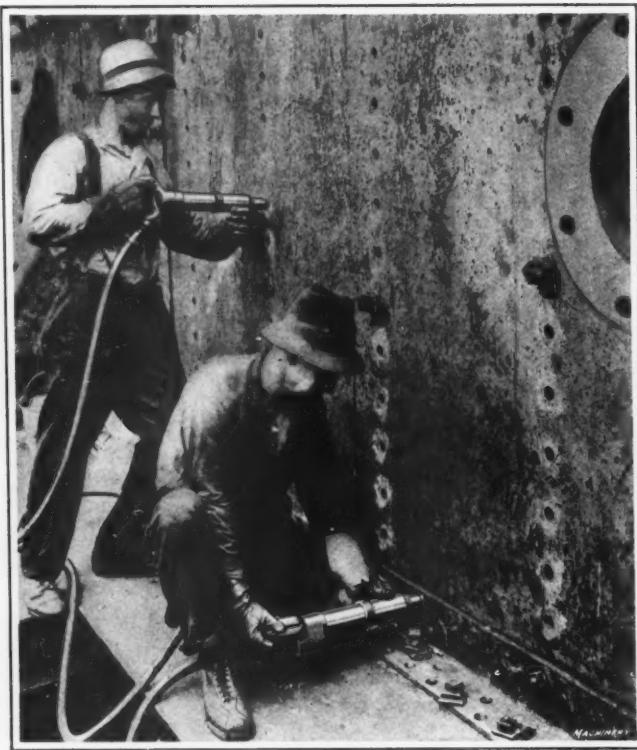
Long-stroke Riveting Hammers made by Independent Pneumatic Tool Co. driving 7/8-inch "Flush" Rivets in Engine-room Bulkheads
